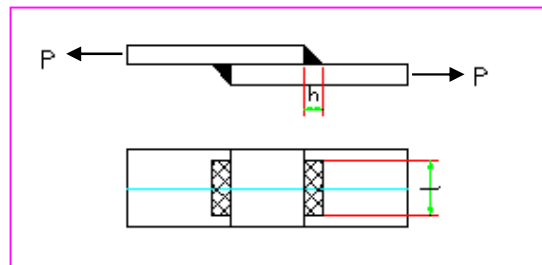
Double transverse fillet weld for side plates.
